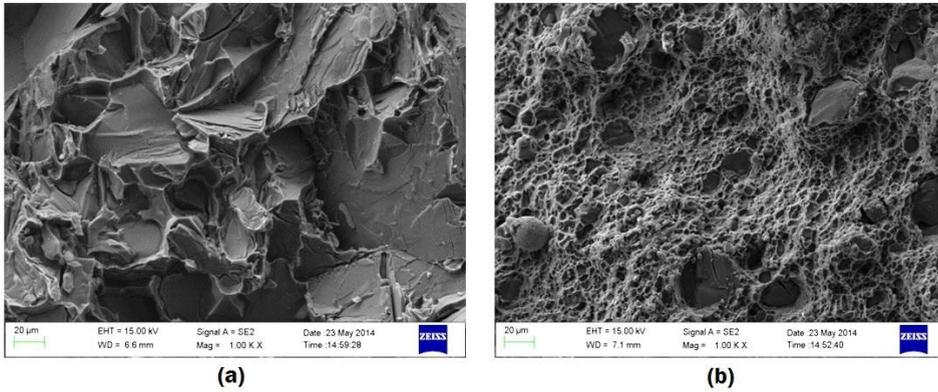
Fracture surfaces of FSPed samples (a) base material and (b) FSPed sample at 26 mm/min and 664 rpm.
